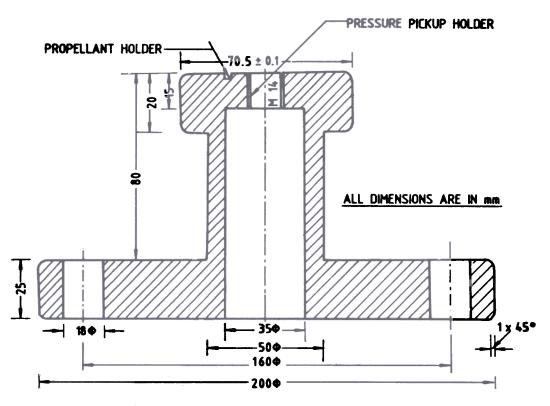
Sectional view of the flange used in shock tube for propellant mounting
